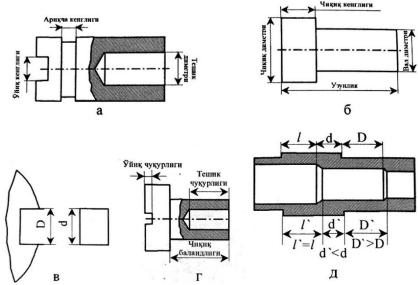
Types of dimensions: a-internal dimensions; b-external dimensions; V-hole (D) and val (d) dimensions; g and d-step dimensions
